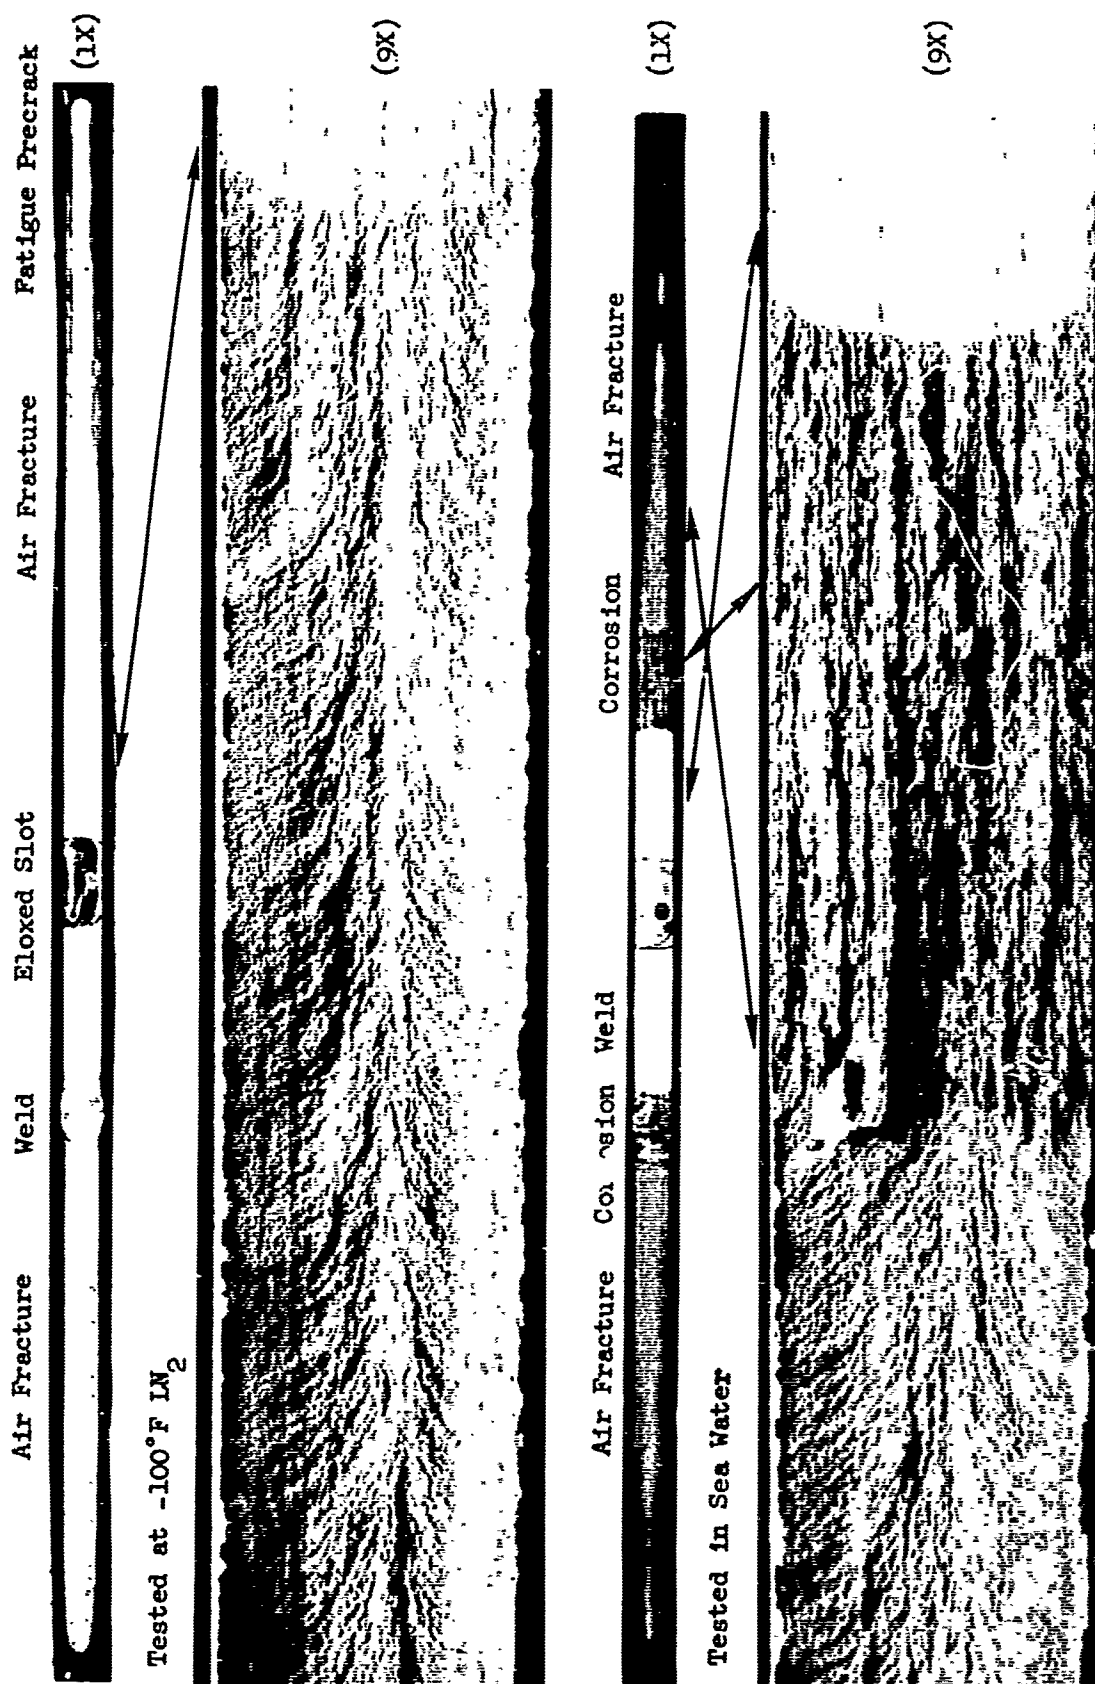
Appearance of Fractured Surface of Ti-8Al-1Mo-1V
